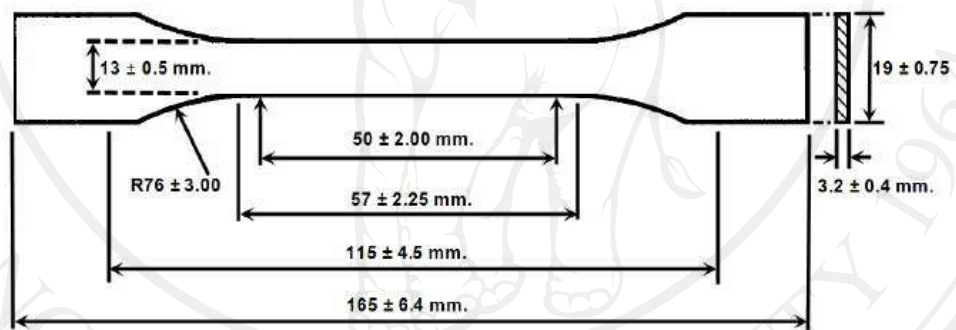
The rubber mold and sample geometry for tensile test [104]
